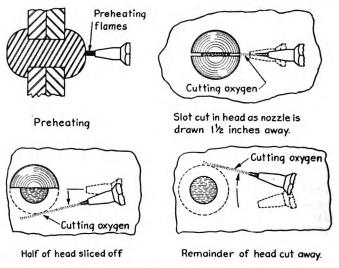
These sketches show the proper manipulation of a standard cutting nozzle in removing the head of a buttonhead rivet
